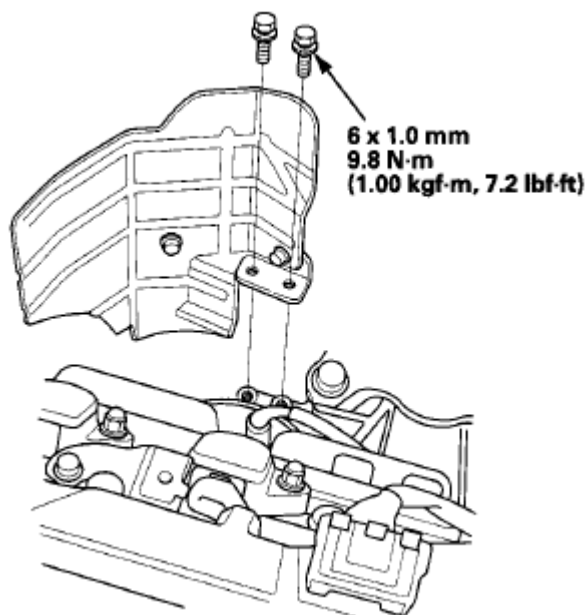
Installing Power Steering Heat Shield With Torque Specifications
